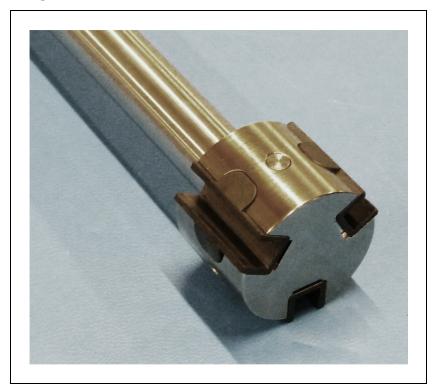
Center Shaft Bushing-holding Fixture, with Bushings
